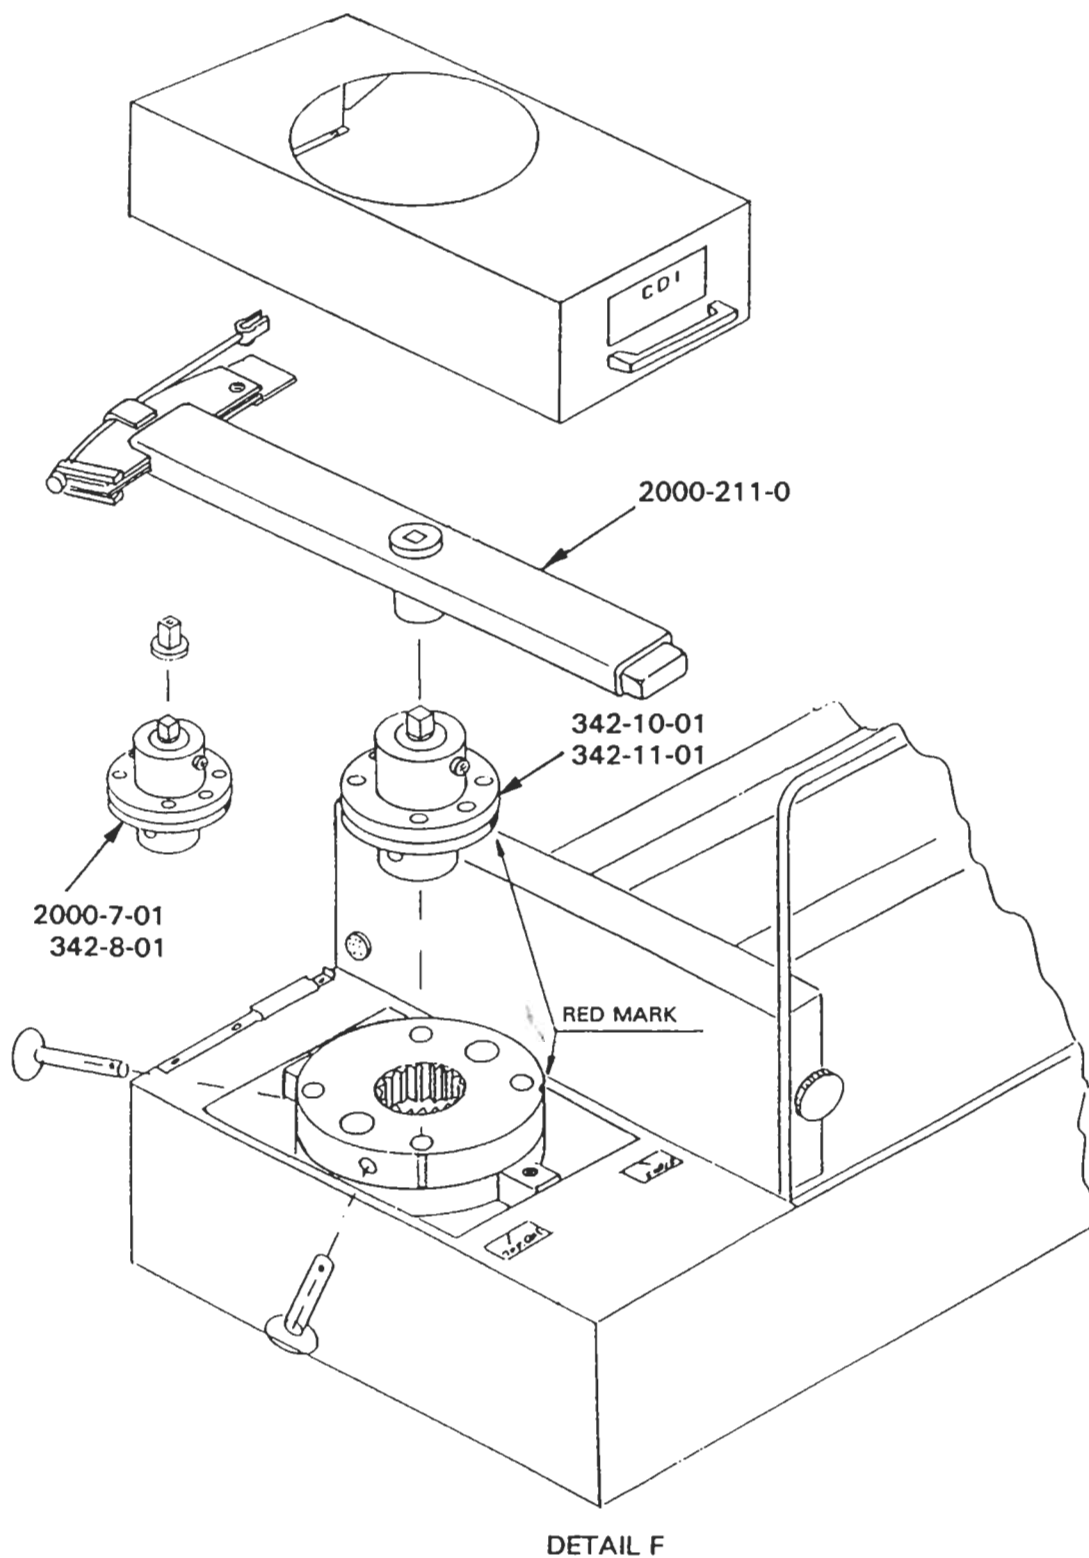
Cable Tensiometer Test Setup (Sheet 6)
